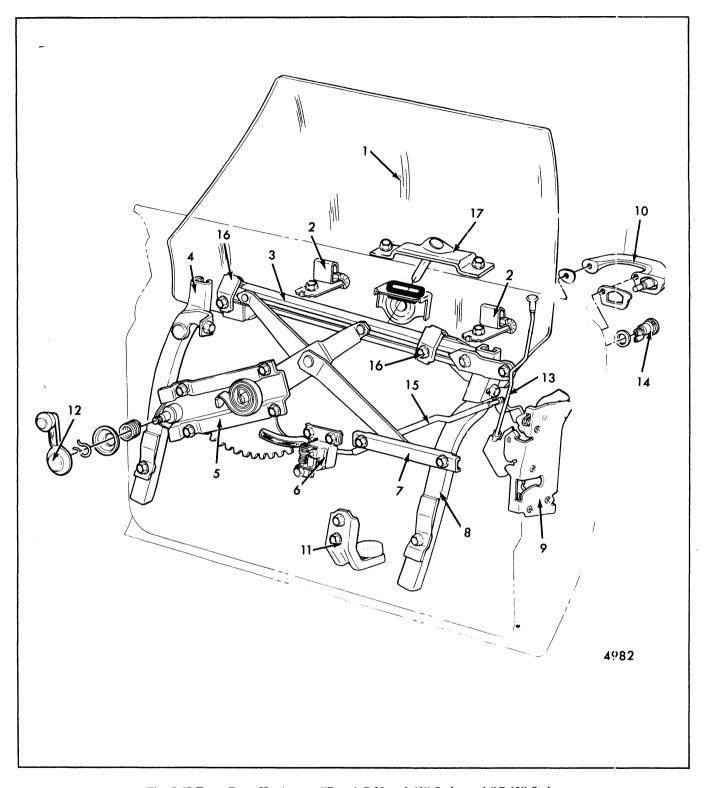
Front Door Hardware - "B and C-39 and 49" Styles and "C-69" Styles
